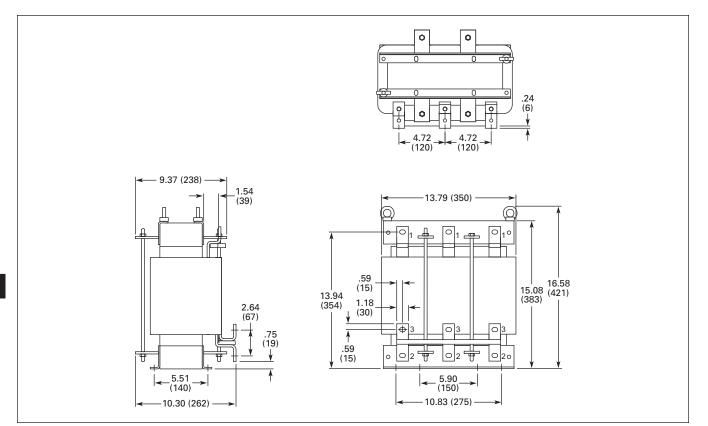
Dimensions of AC Choke CHK0400 in Inches (mm)
